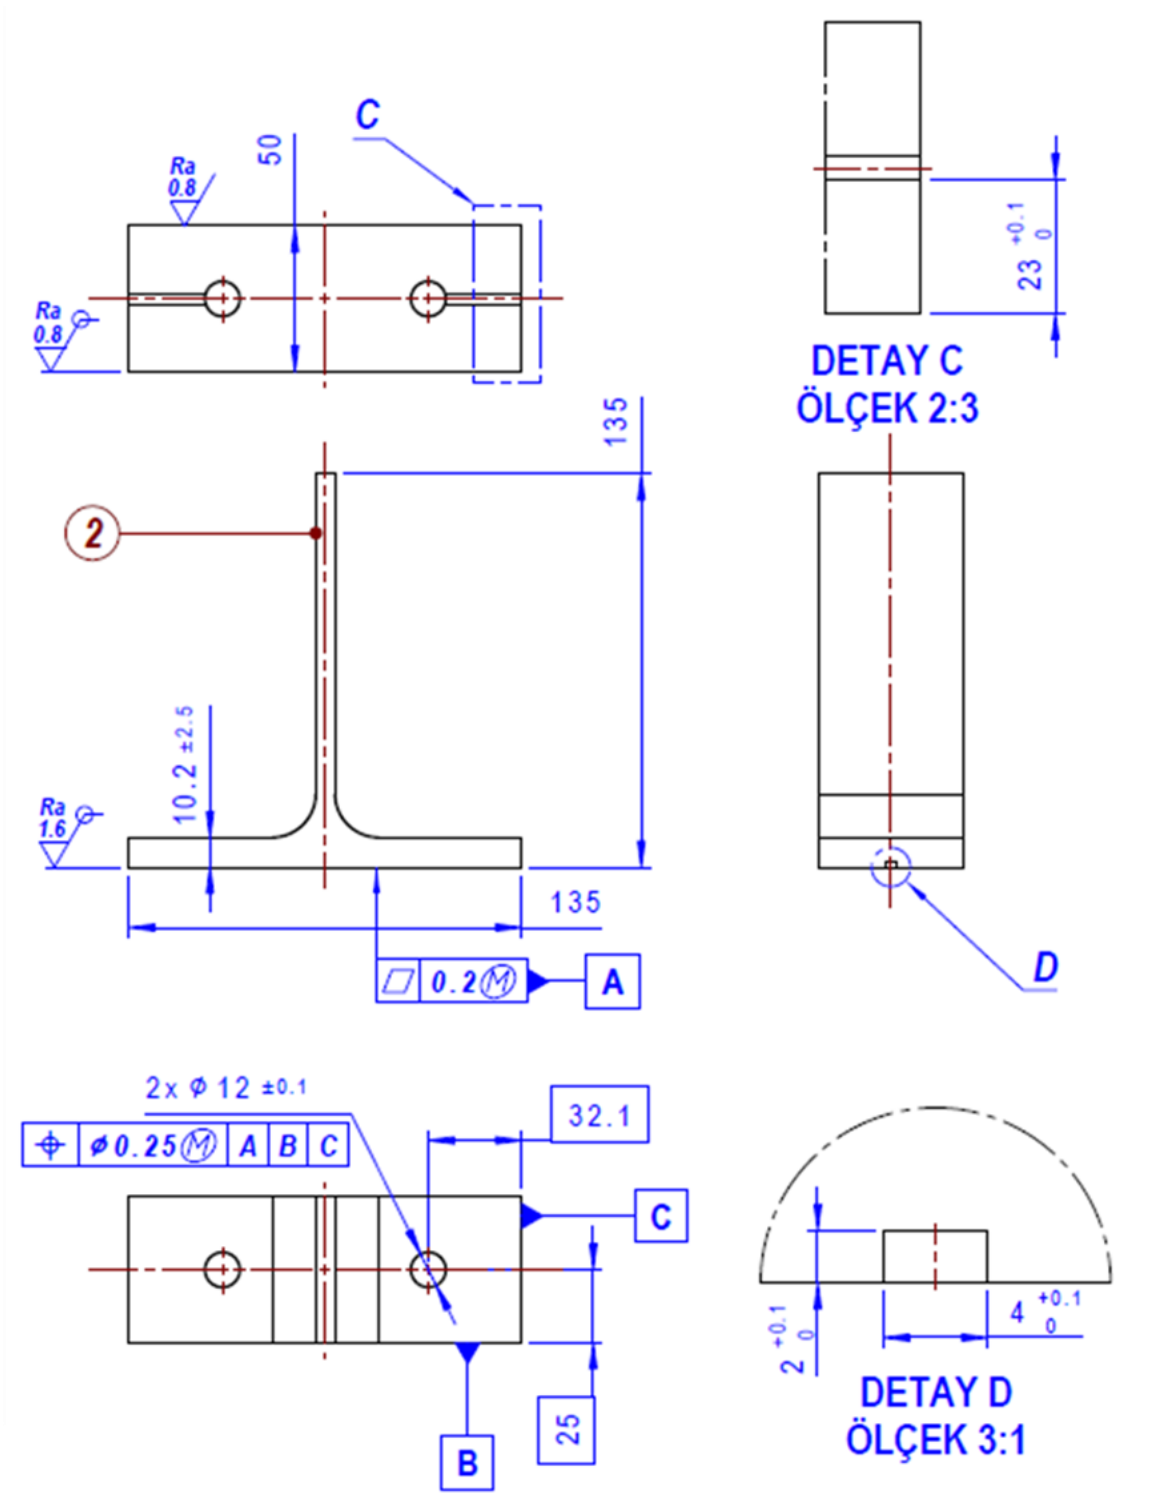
The technical drawing of the setup part with lower eccentricity.
